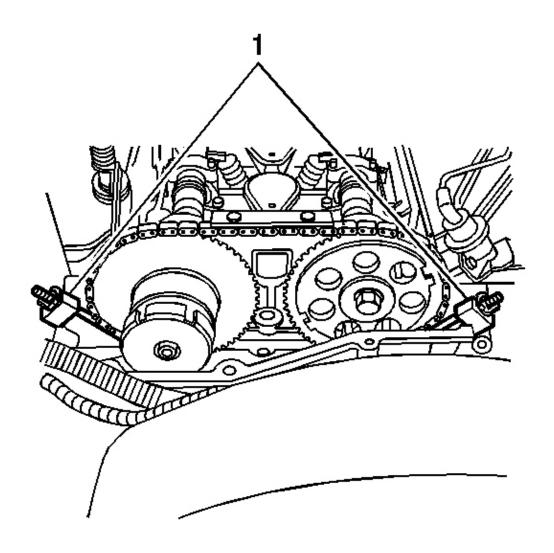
View Of J 44217 & EN-44217-45 At Timing Chains Courtesy of GENERAL MOTORS CORP.
